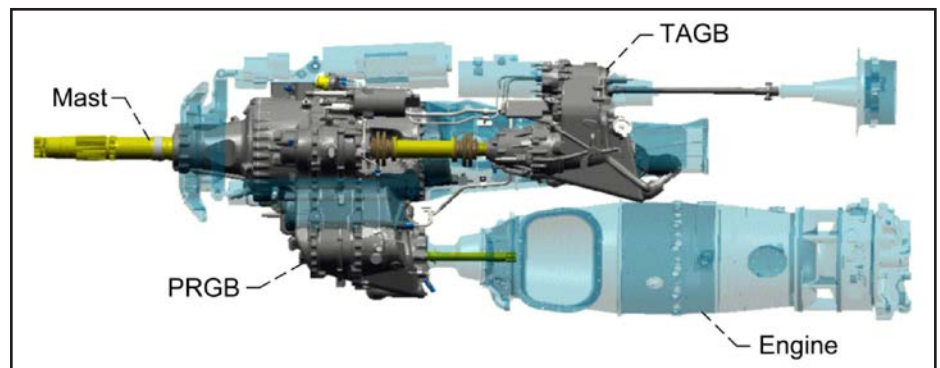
Propulsion system components that reside within aircraft nacelle — tilt axis gearbox (TAGB), and prop-rotor gearbox (PRGB).
